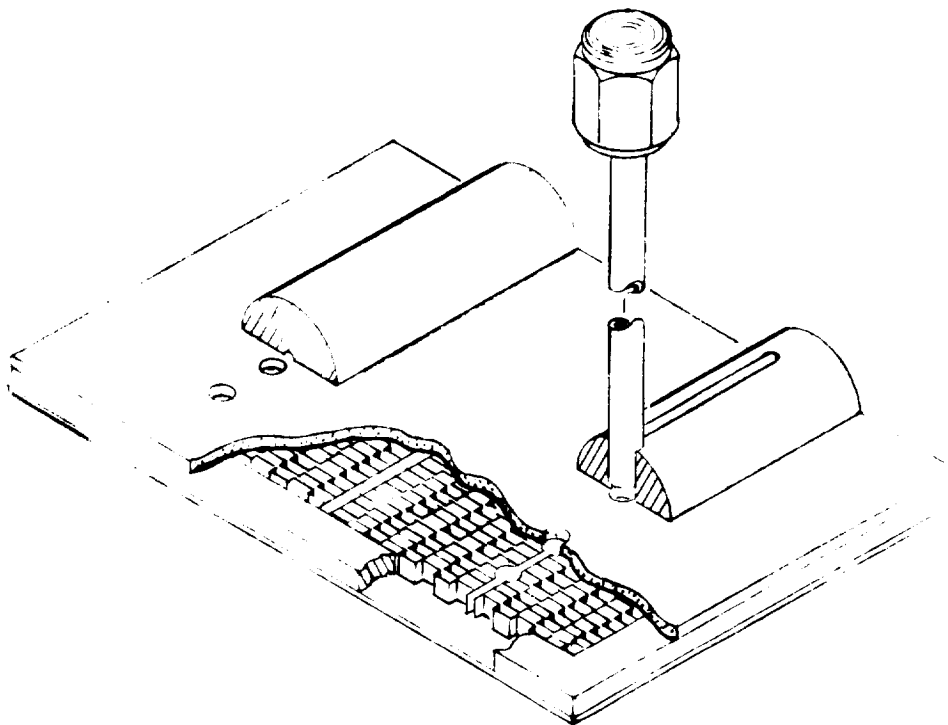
Coolant Exhaust Continuous Joint Flat Panel
